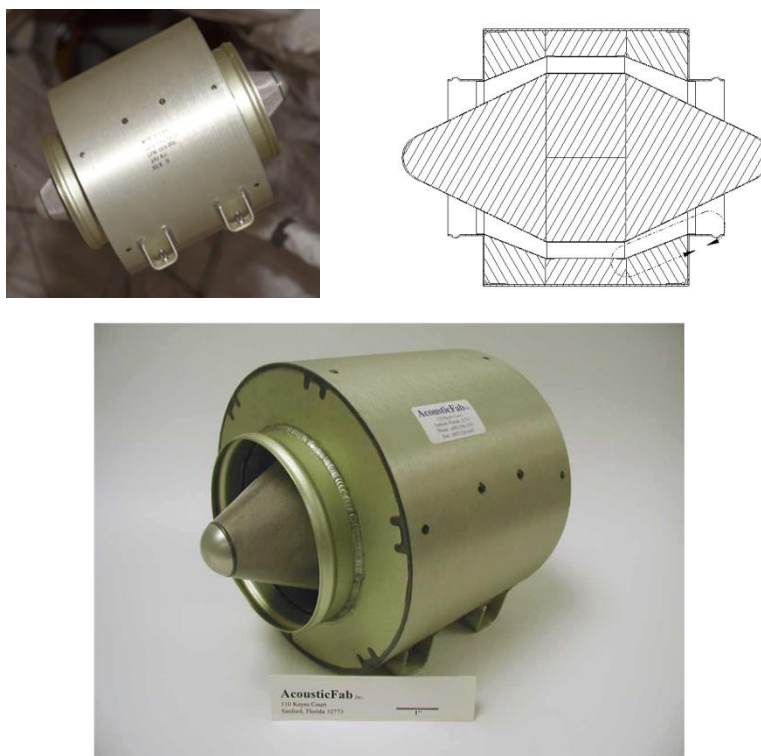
U.S. Laboratory IMV fan muffler and cross-section (upper right hand illustration and lower photograph are courtesy, S.A. Denham - Boeing).
